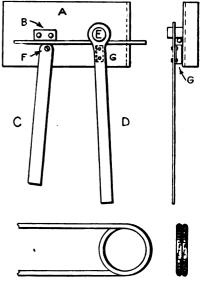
TOOL FOR BENDING RIGHT ANGLES.
